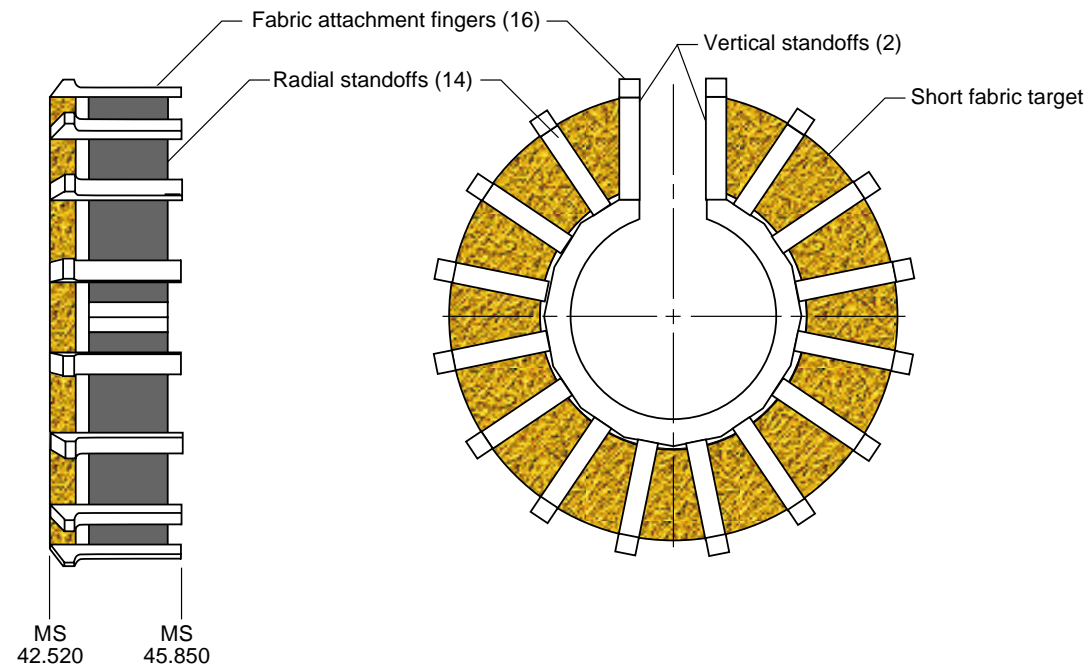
Details of fabric target thrust reverser model. Dimensions are in inches.
